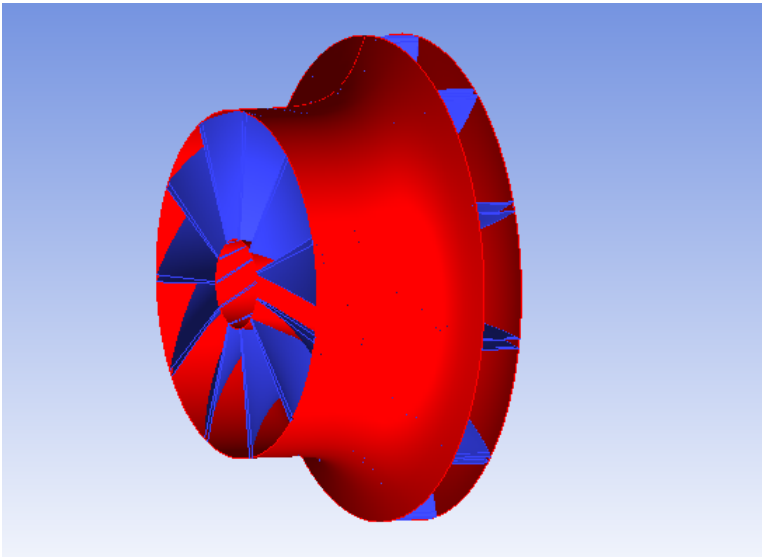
3D geometry generation test of the impeller blades and casing.
